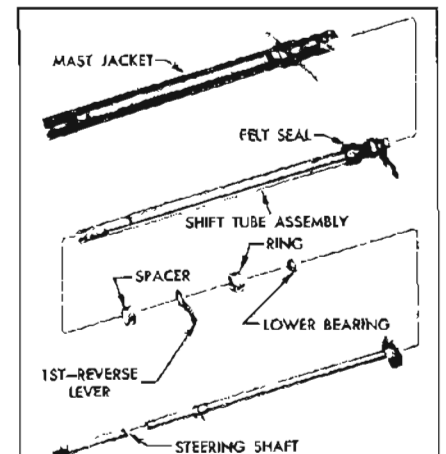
Disassembly of Lower Portion of 3 Speed Transmission Mast Jacket
